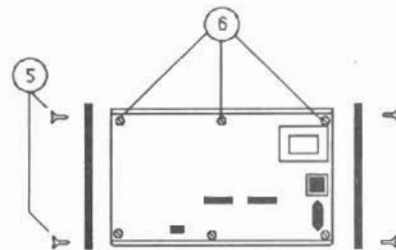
Rear view of indicator chassis showing removal of end panels and back panel retaining screws.
